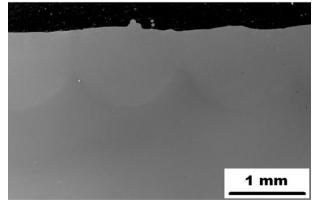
Cross section of the weld cladding coating after cooling in water and cleaning of oxide layers; The Figure demonstrates that the weld cladding coating was free of cracks and without topological error (SEM, 10kV, SE)
